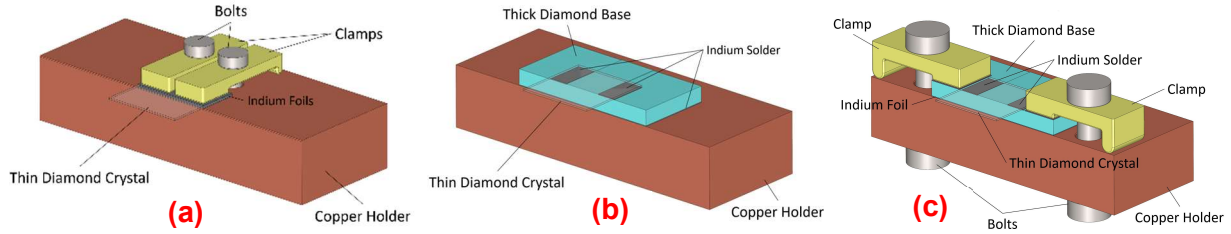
Three different mounting designs for thin diamond crystals. (a) Clamping; (b) soldering; (c) hybrid clamping-soldering.
